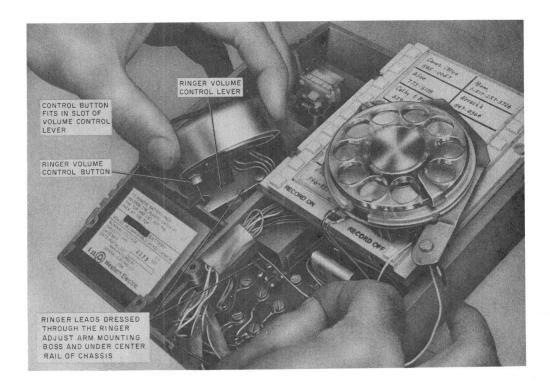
Ringer Being Installed in 960A01M Chassis With Dial Rotated Onto Memory and Shield Removed
